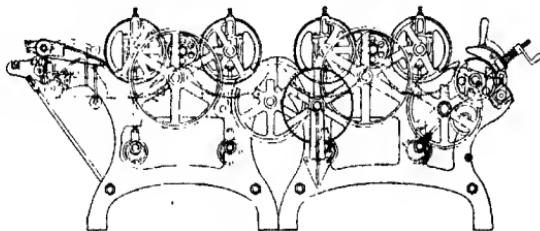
FIVE-ROLL IRONER. SECTION.
